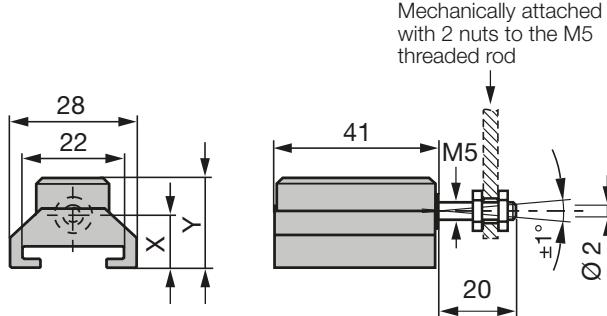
Installation dimensions of BTL5-M/N-2814-1S magnet
